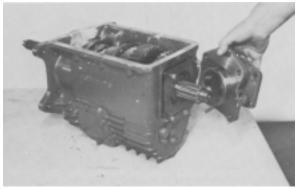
Position the same shims that were removed at disassembly over mainshaft rear bearing cap studs. Install bearing cap. Install bearing cap lockwashers and stud nuts.
